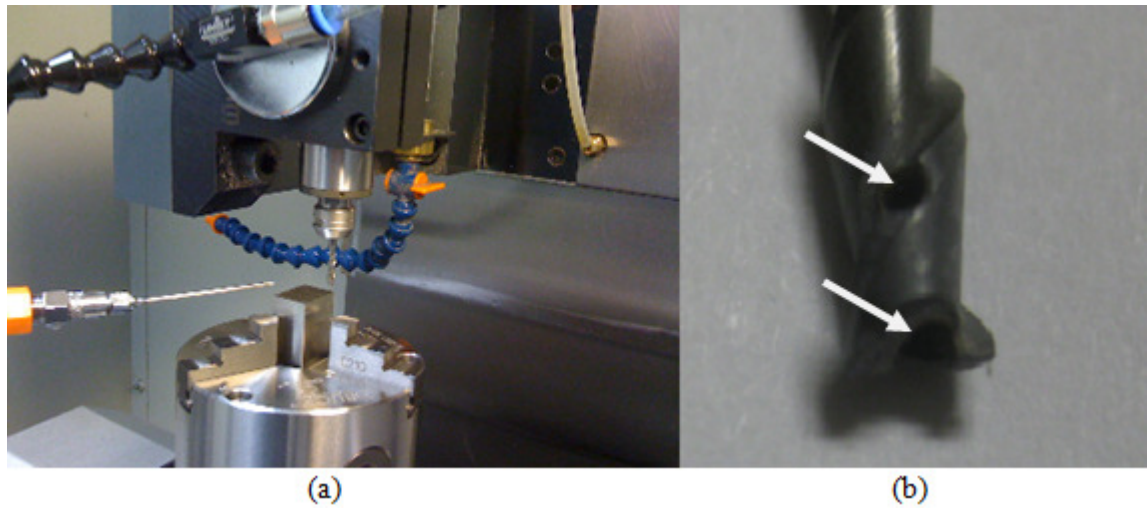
(a) Mist spray on a 3.175mm 2 flute end-mill. Nozzle is horizontally positioned at a radial distance of 25.4mm from the tool surface pointing towards the center of the tool. (b) Arrows pointing at the holes drilled on the tool.
